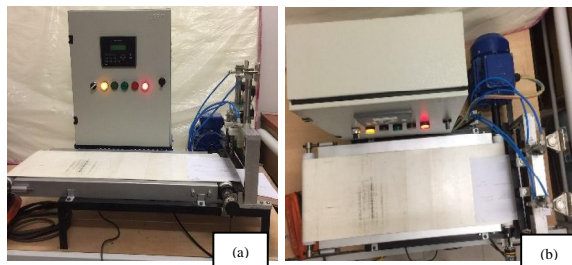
Cut to Length Machine (a) Front view (b) Top view
